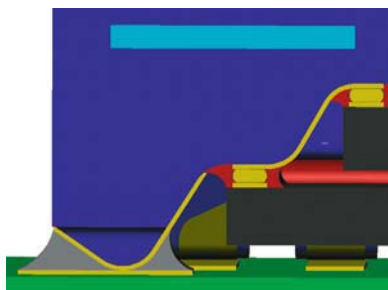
CAD-cross-section through an alternative design using NCA-flip-chip assembly technology
